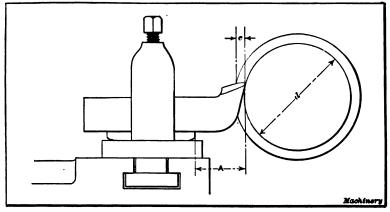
To avoid springing, Overhang A of Tool should not be too great
